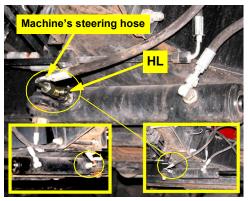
with insets: Run-tee at steering cylinder, machine's steering hoses reconnected
